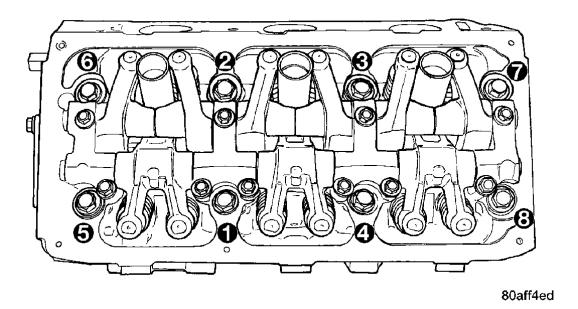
Cylinder Head Bolt Tightening Sequence Courtesy of CHRYSLER LLC
